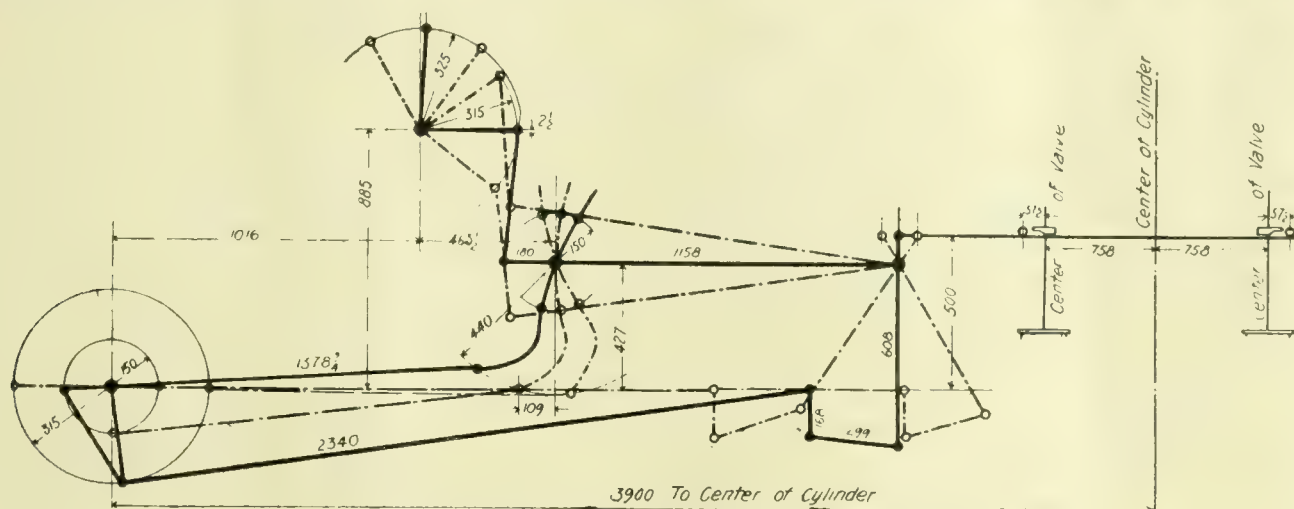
DIAGRAMMATIC ARRANGEMENT OF VALVE GEAR.
